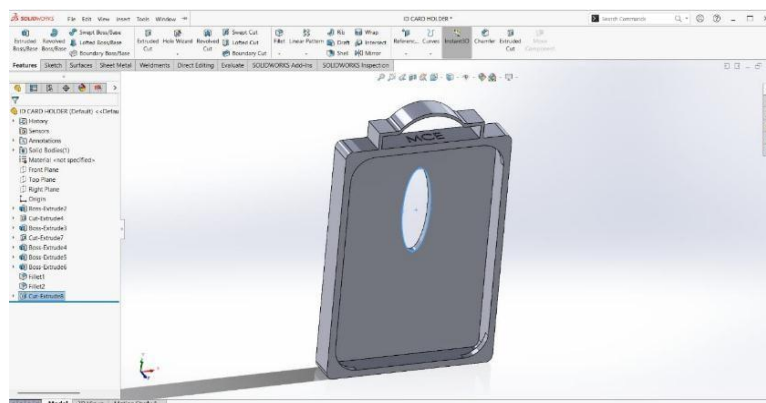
CAD model of a customized ID-Card designed using Solidworks for fabrication using FDM 3D printing technology.
